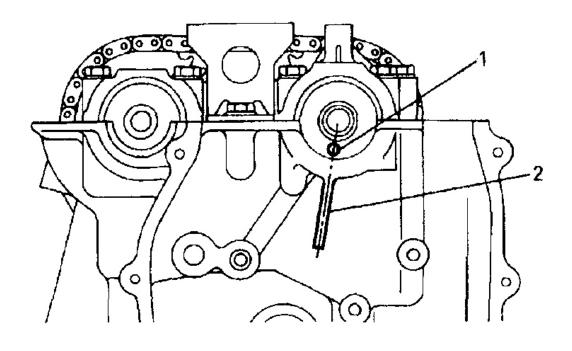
Checking Timing Mark On Crankshaft Courtesy of SUZUKI OF AMERICA CORP.
